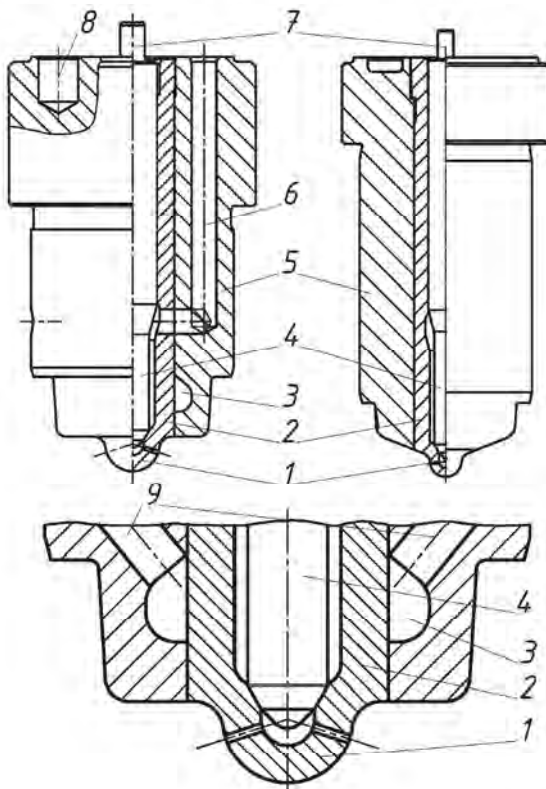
Jet type nozzles: 1 – tip of the nozzle with holes; 2 – guide insert of the needle valve; 3 – cavity for coolant; 4 – needle valve; 5 – spray housing; 6 – channel for supplying fuel to the cavity of the nozzles; 7 – needle valve shank; 8 – hole for the mounting pin; 9 – coolant supply channel (adapted from [15])
